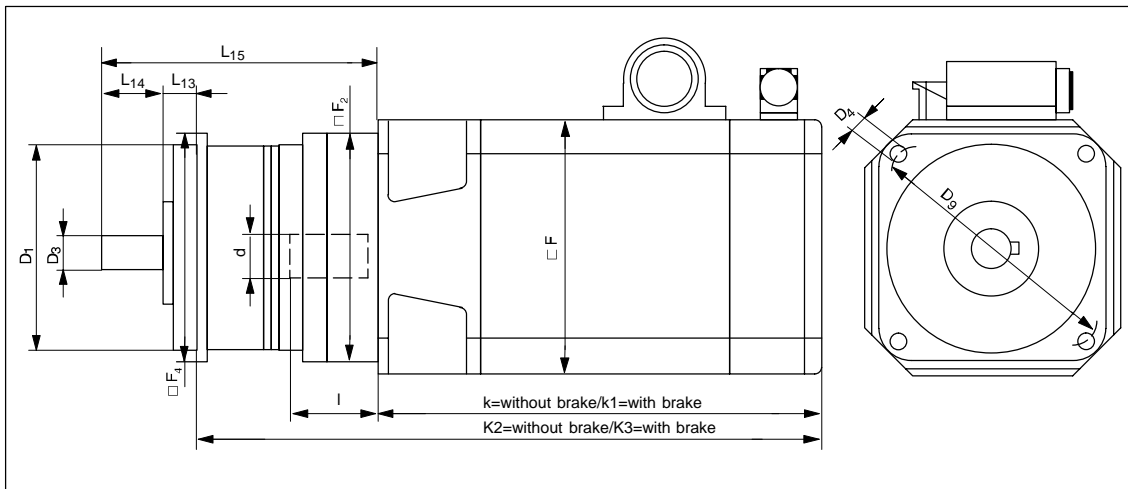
1FT6 motor with planetary gearbox (alpha company) SPG 1-stage, dimensions in [mm]
